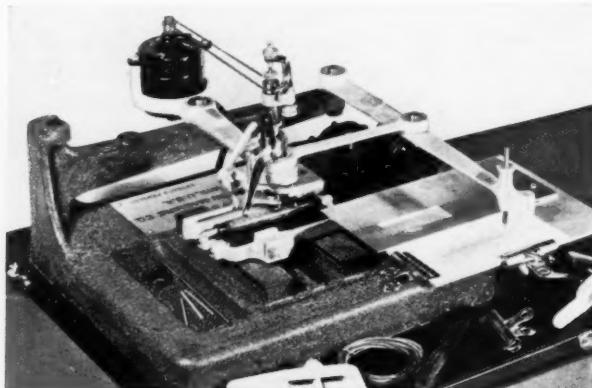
Vibration, detrimental to performance of engraving machine, is obviated by belt drive
